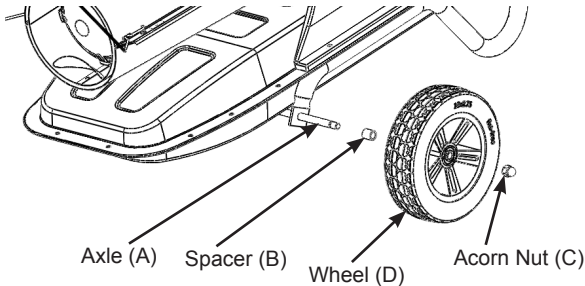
Wheel Assembly, 160, 175 and 220 Models
